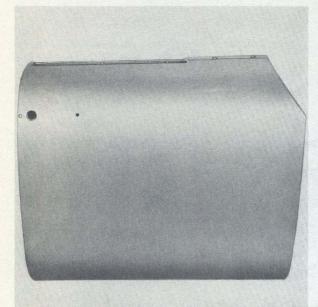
Right Door: Stage "A" or Skeleton (Outside View).
